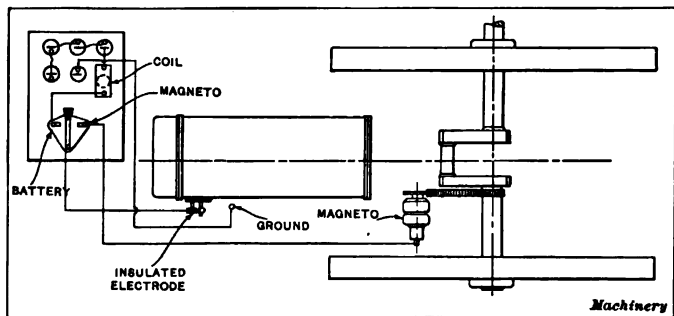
Wiring for Horizontal Engine with Batteries and Gear-driven Magneto
